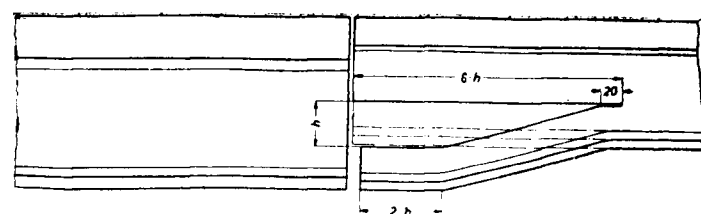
Welding preparations on a transition joint by adjusting the smaller rail section to the bigger one.
